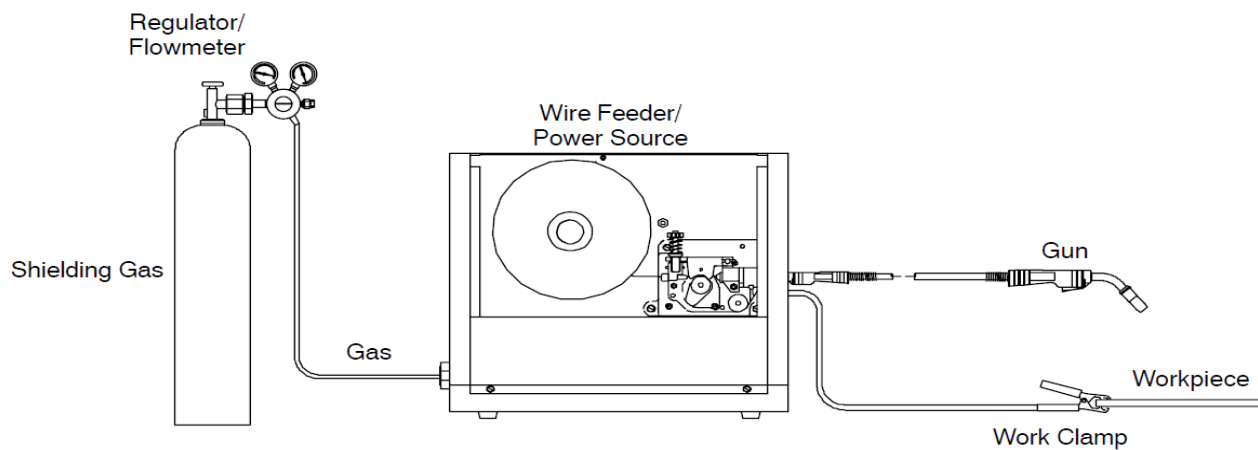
Typical MIG or “Wire Feed” welder [4]
